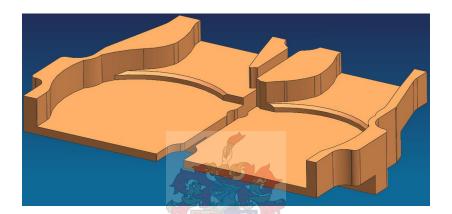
Inserts to guide to cooling water in the cooling cavity.
